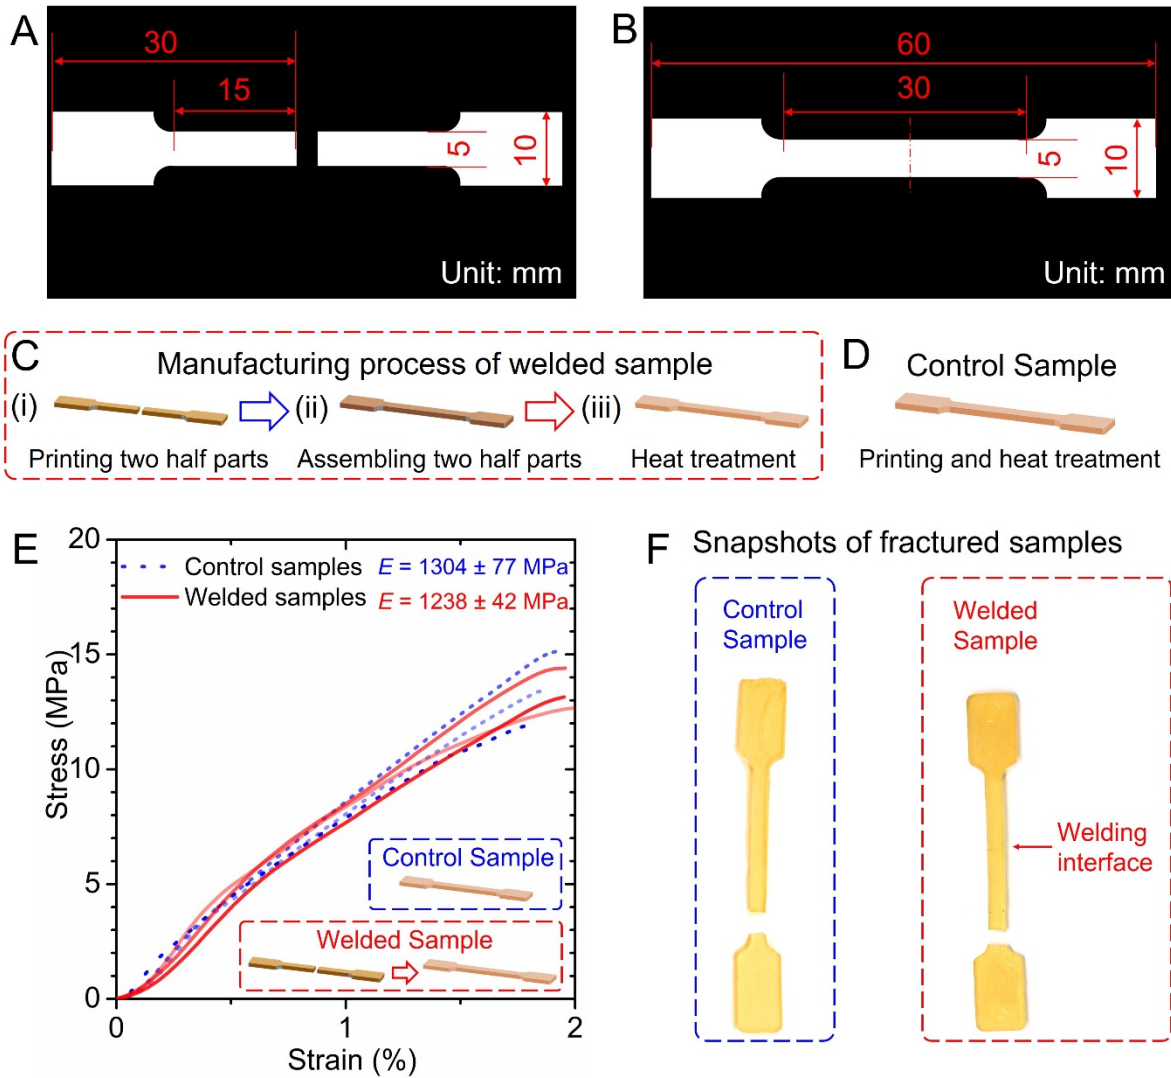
Design and manufacturing details on the dog-bone samples for uniaxial tensile tests to investigate interfacial bonding. (A) Top-view profile dimensions of the welded sample. (B) Top-view profile dimensions of the control sample. (C) Manufacturing process of a welded sample. (D) Manufacturing process of a control sample. (E) Stress-strain behaviors for both welded and control samples. (F) Snapshots of fractured samples.
